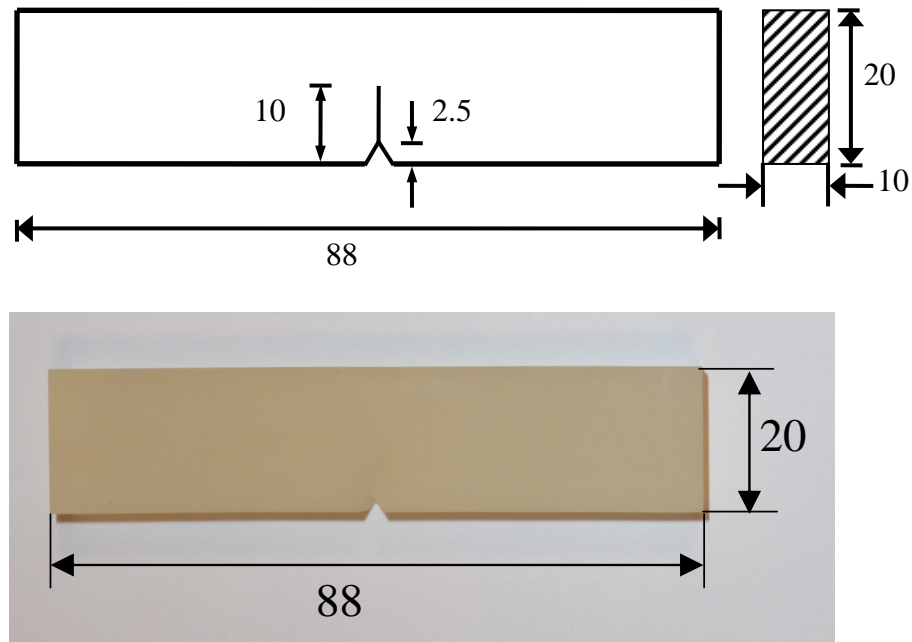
Single Edge Notch Bending (SENB) specimens used in the tests. Size in mm.
